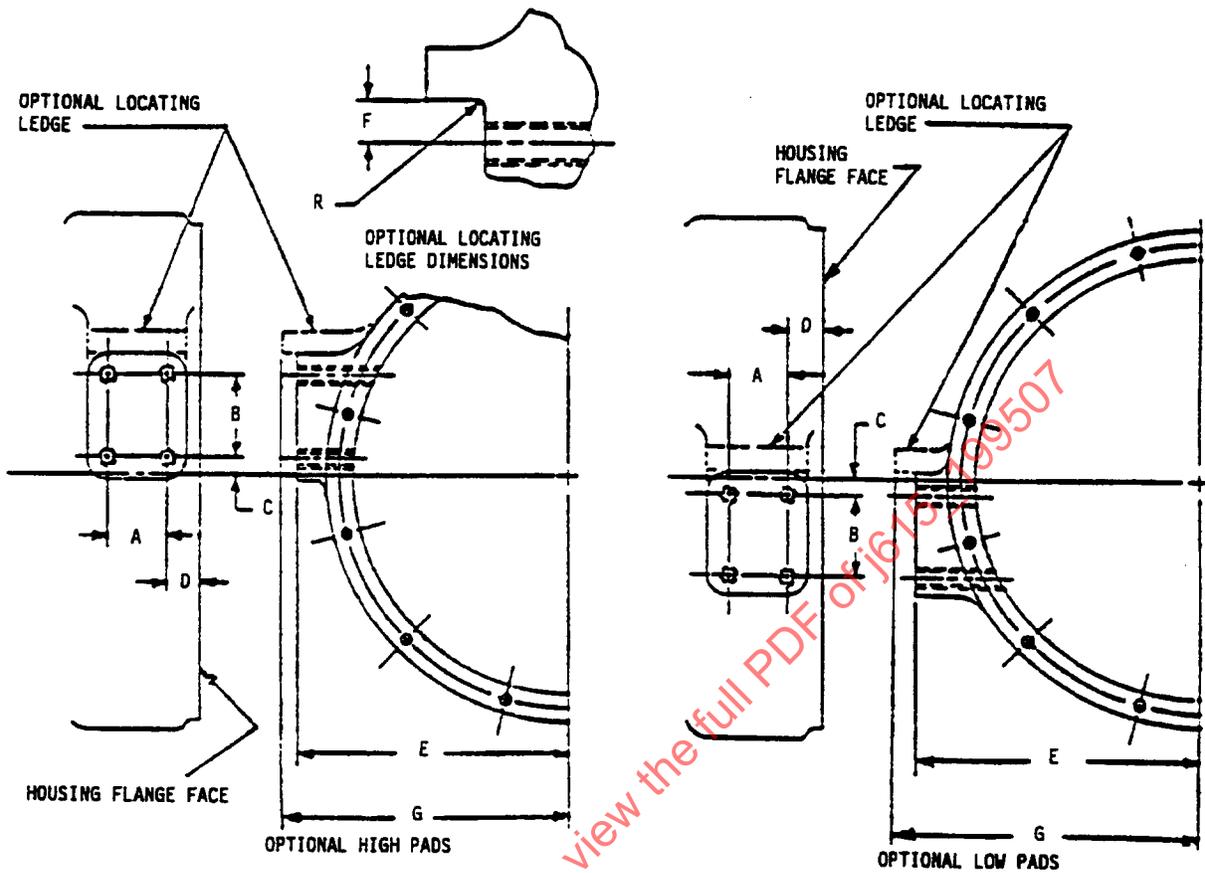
SIDE PAD MOUNTING DIMENSIONS
